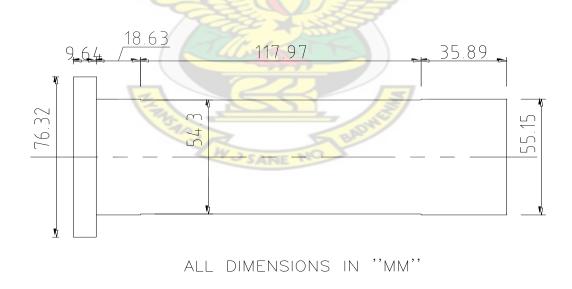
Schematic diagram of piston used for briquetting showing its dimensions
